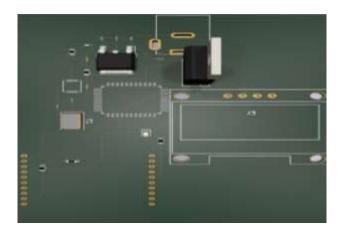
3D view of the final design of the pcb *Source: Own Elaboration
